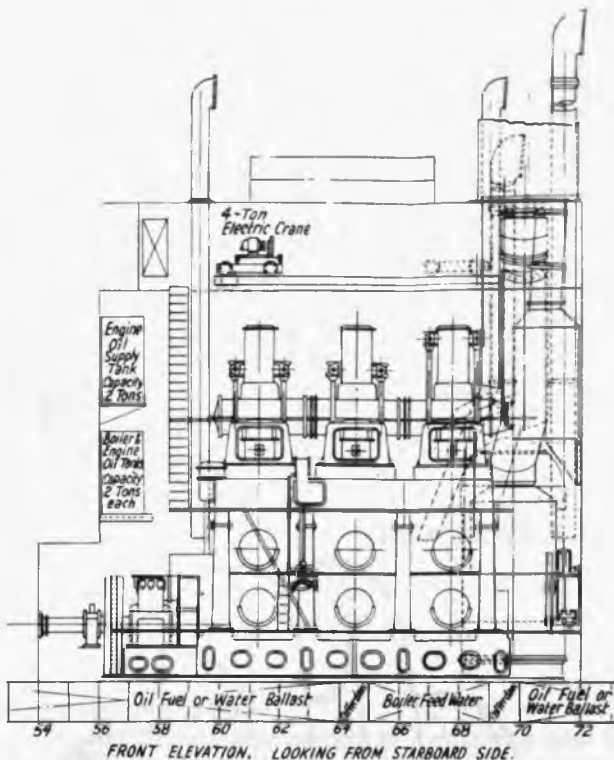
Machinery Arrangement for 3 Cylinder Engine m.v. 'Silverelm'
